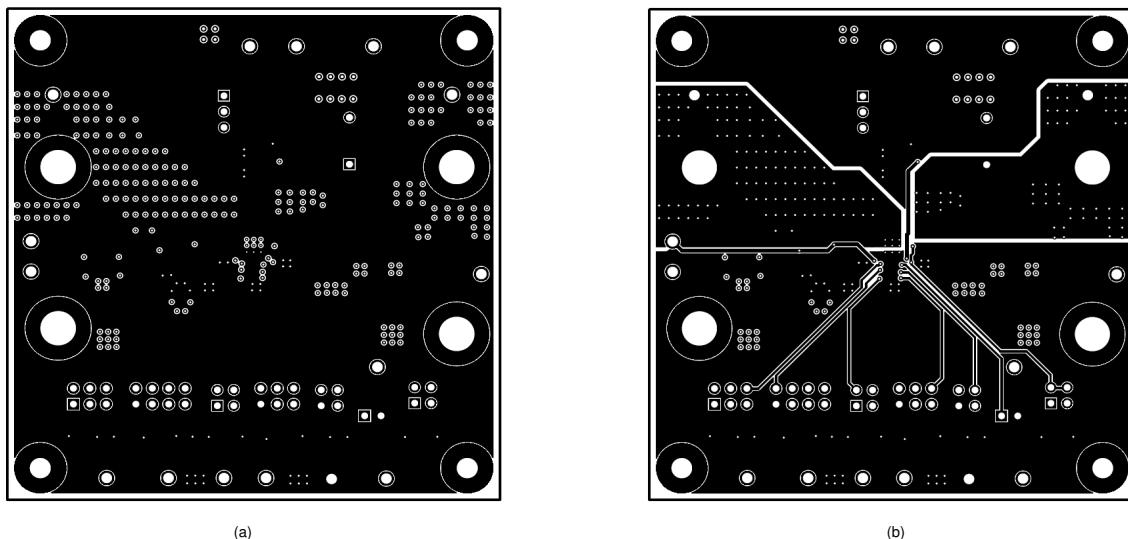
TPS25980EVM Board (a) Top Layer (b) Bottom Layer
